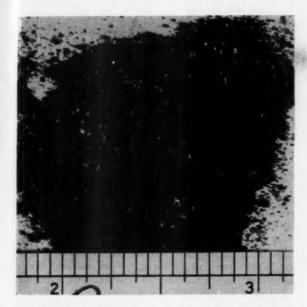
Clay balls in sample of air-dried molding sand which caused surface pits on casting in Fig. 5.
